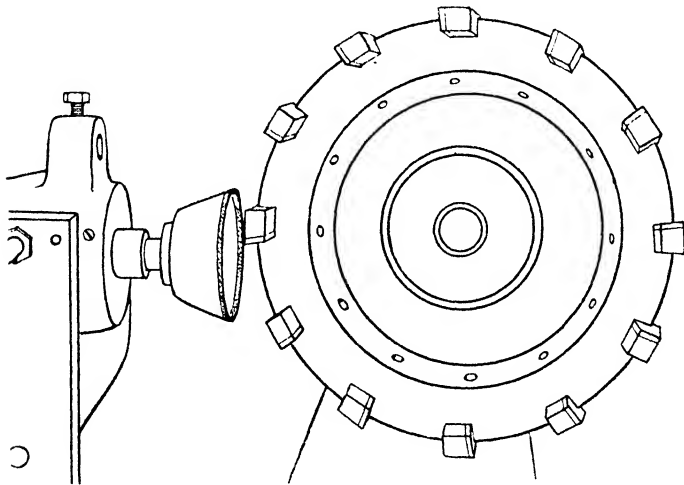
Grinding the teeth of a milling cutter on a diamond-impregnated wheel (metal bond)
